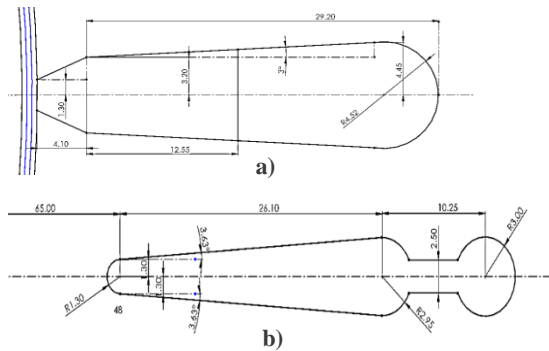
Dimensions of a) Stator Slot b) Rotor Bar.
